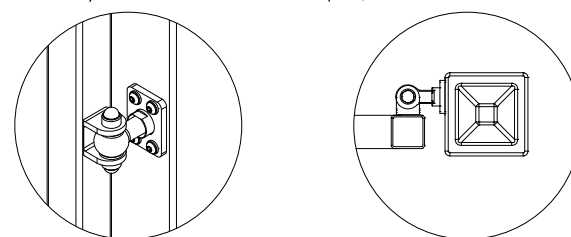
Wicket: standard installation type (MODERN type with installation on steel posts).
